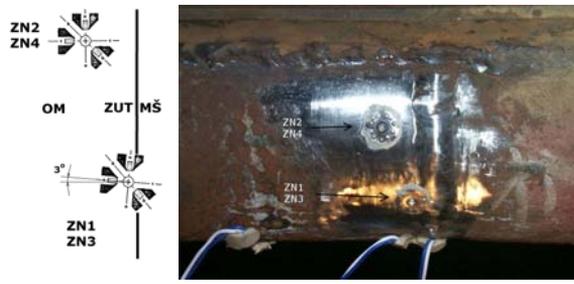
Measuring location 2 (tube 13, misalignment defect involved during welding in the assembly process).
